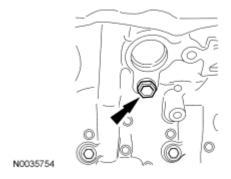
Engine Block Drain Plug Courtesy of FORD MOTOR CO.
